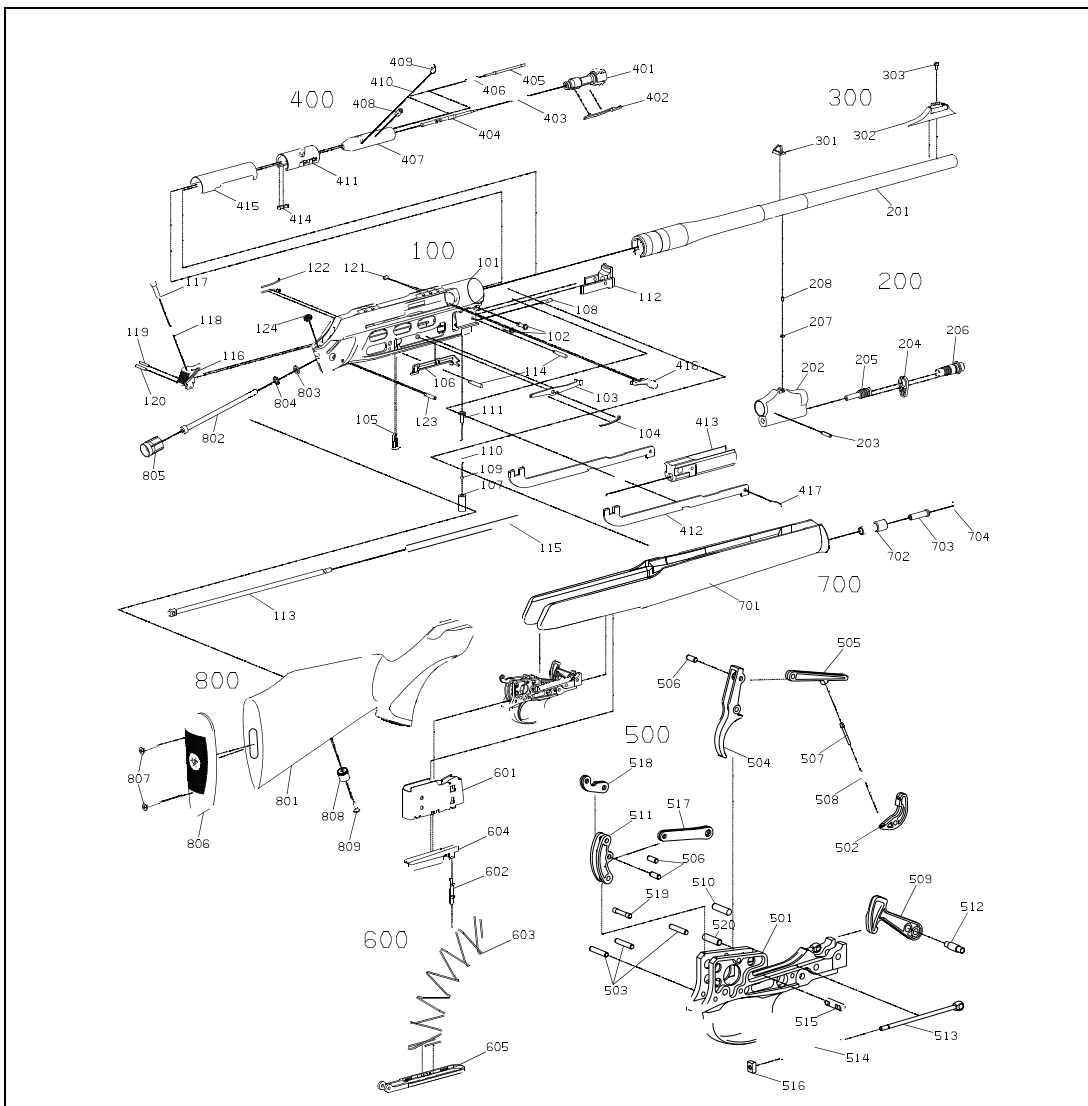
, Spare parts for S 303 (Version with fixed fold out cover magazine)
